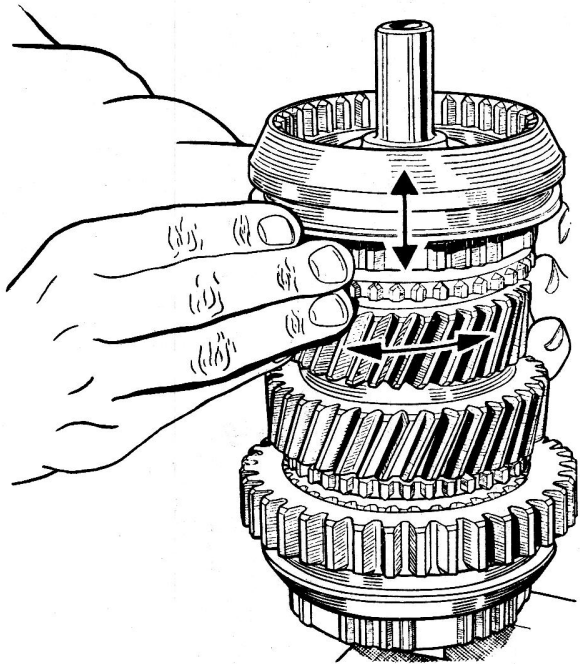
Checking 4th (top gear) interlock plunger and assembly
